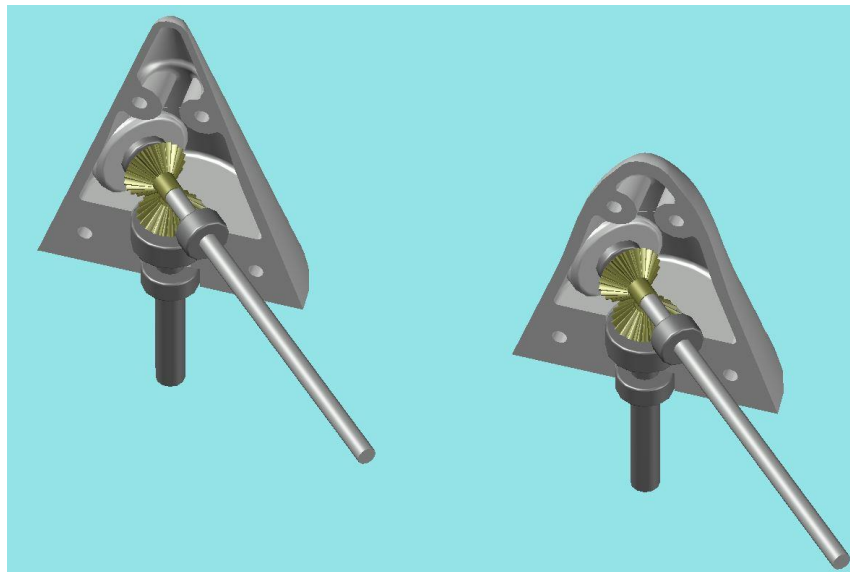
Sliced perspective view of conical and snub bevel gearboxes
